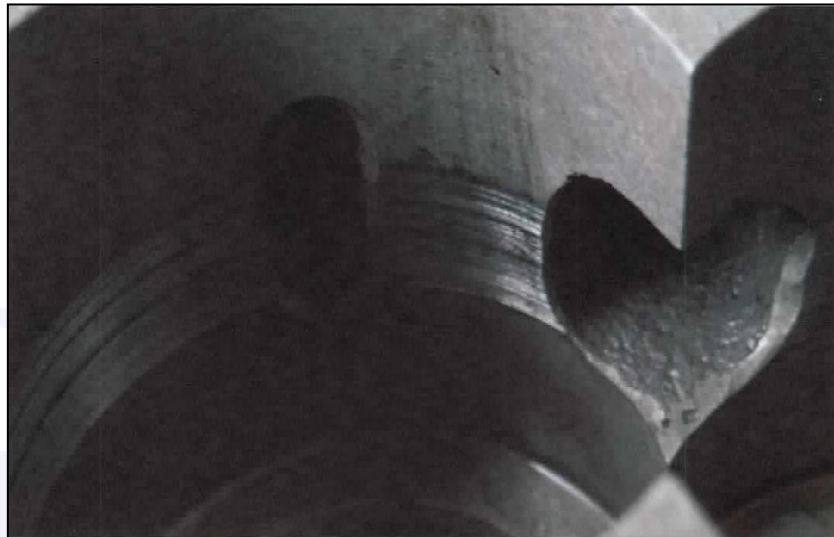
Closer view of the fuel pump, with marks of rubbing in the housing of gears.
